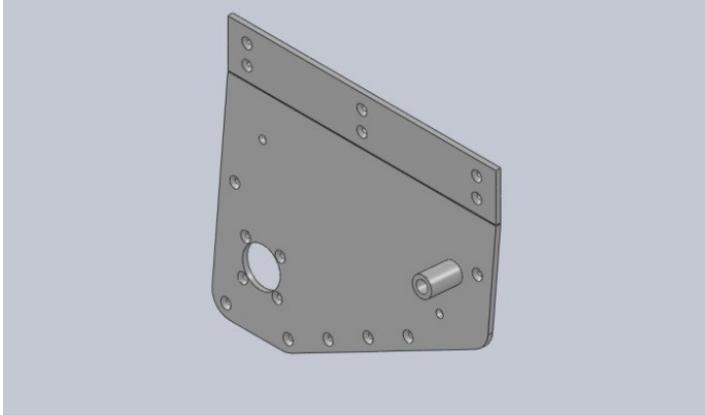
A new 1/4" 6061-T6 aluminum mounting plate was designed to provide the revised 7° wheel camber angle, and increase ground clearance to 6". Plates are asymmetrical and mount either left or right side.
